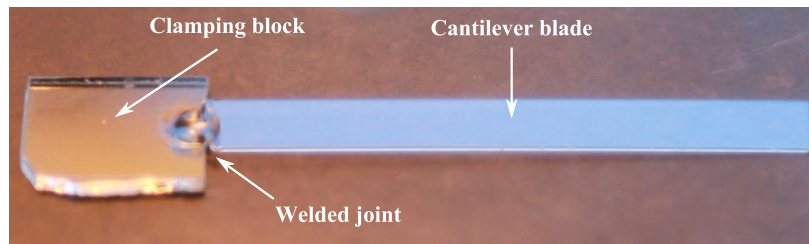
Silica cantilever blade laser-welded to a silica clamping block.
